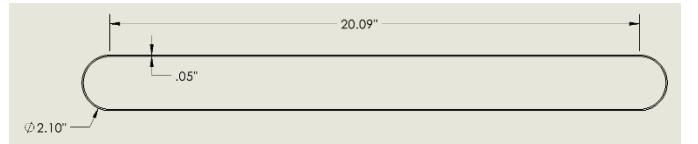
SolidWorks drawing of conveyor belt model (CHPOWER Updated 3D Printer Conveyor Belt IR3-P1) with dimensions in inches.
